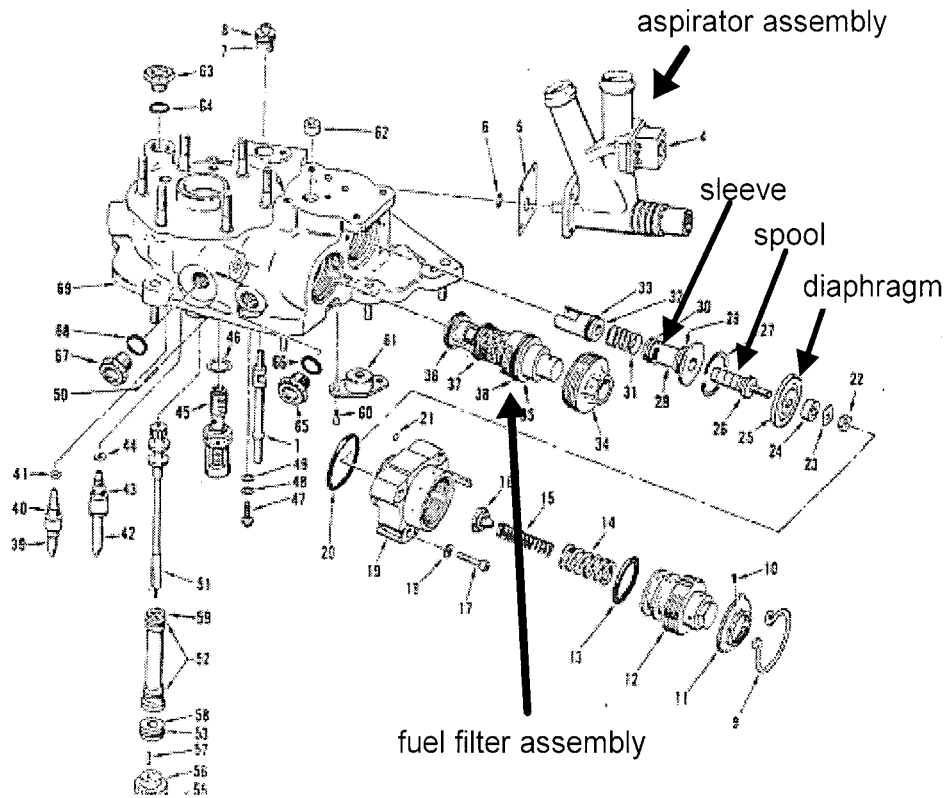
Diagram of a portion of the fuel control unit showing the aspirator assembly and fuel filter assembly.
